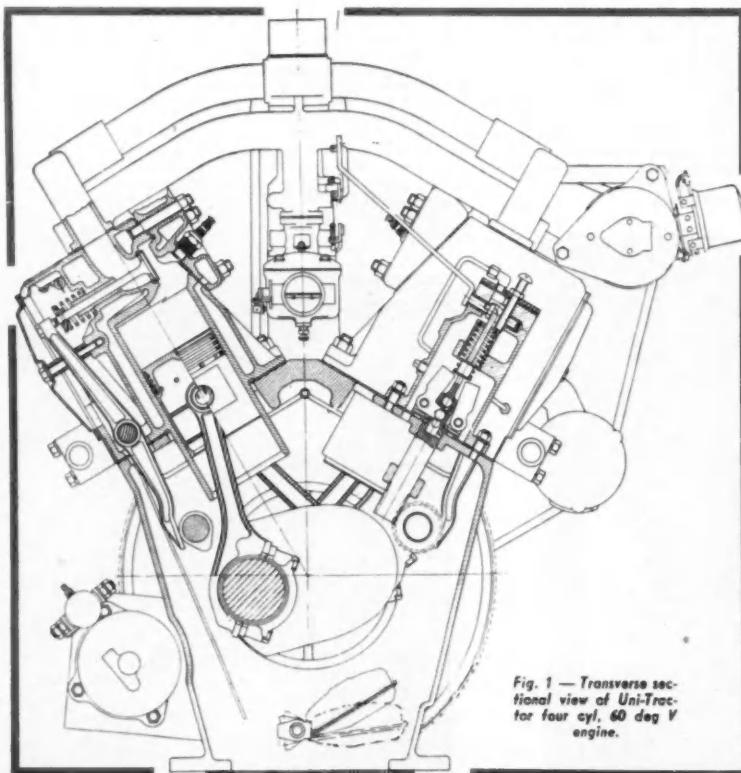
Transverse section of Uni-Tractor four cyl. 60 deg V engine.
